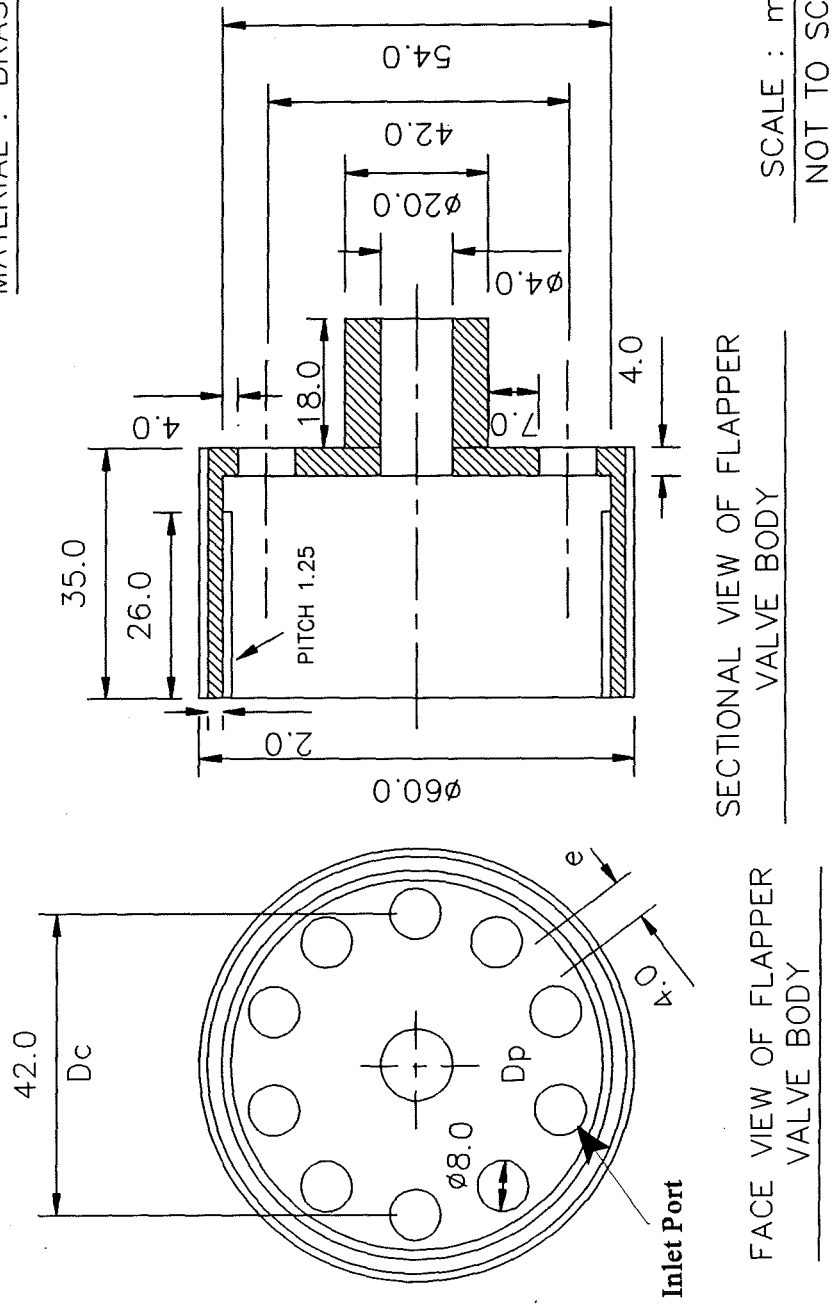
14 Sectional and face view of the flapper valve carrier used for the 15 kW combustor.
